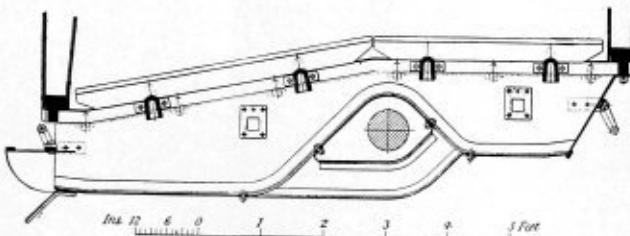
ASH-PAN AND FIRE-BAR ARRANGEMENT FOR A FOUR-CYLINDER PASSENGER ENGINE.
